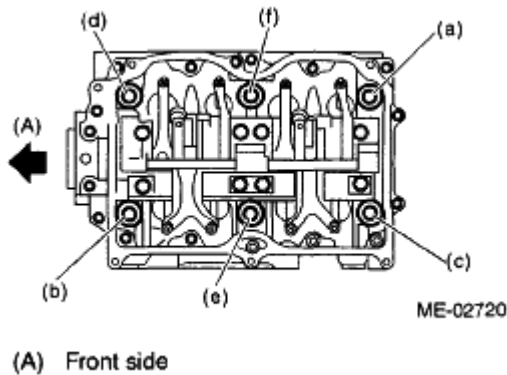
Identifying Removal Sequence Of Cylinder Head Bolts
